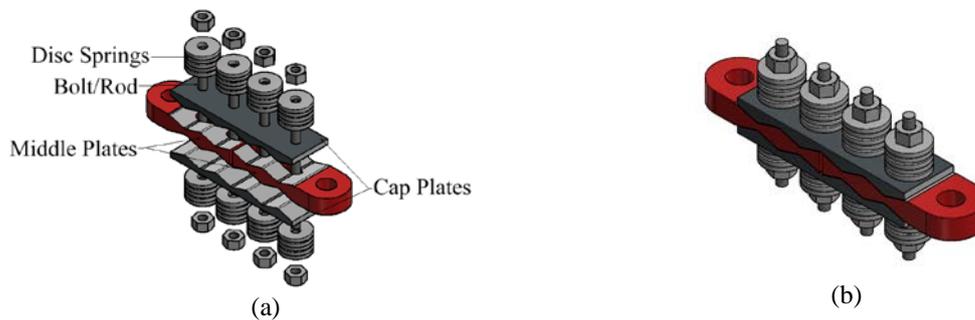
(a) Components of the RSFJ, (b) RSFJ assembly
